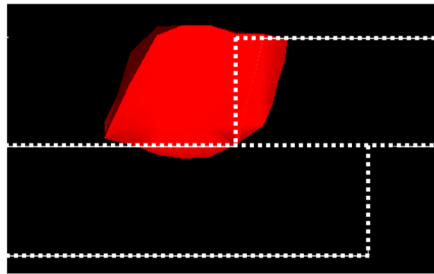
Penetration shape of lap joint with assuming adiabatic condition before welding.
